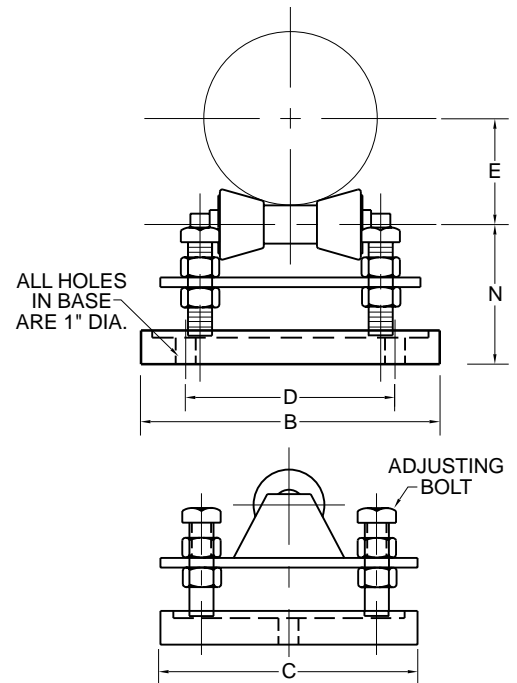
ADJUSTABLE STEEL CHAIR AND ROLL
